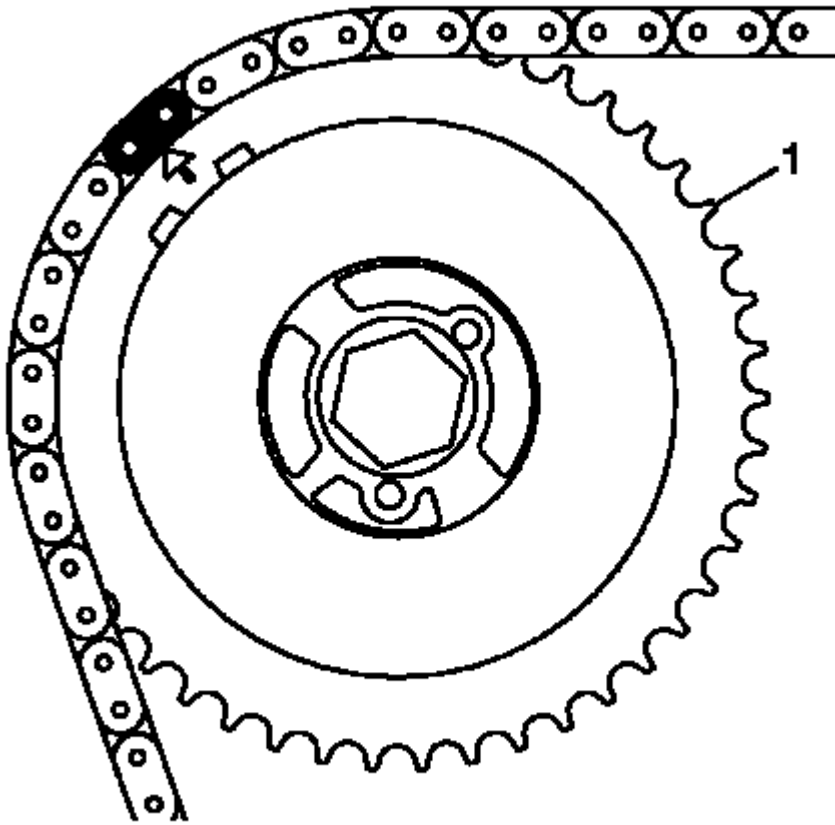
Exploded View of Exhaust Camshaft Actuator
